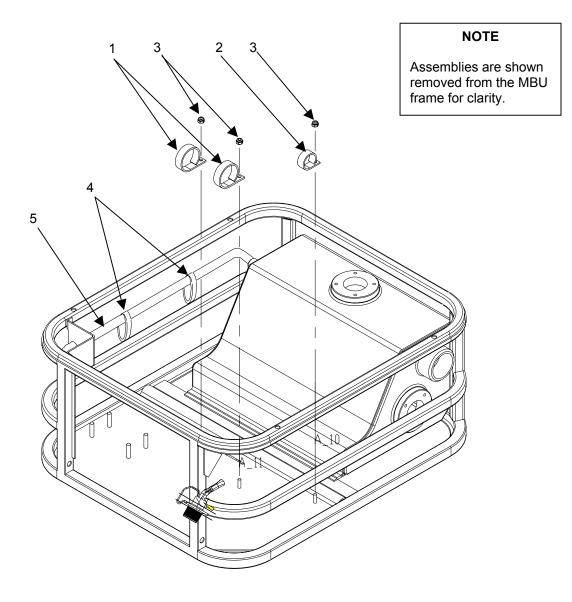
Replace Chassis Mounted Cable Clips and Hose Clamps
